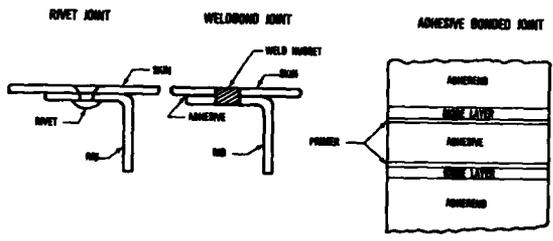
COMPONENTS OF A RIVETED JOINT, WELDBOND JOINT AND ADHESIVE BONDED JOINT
